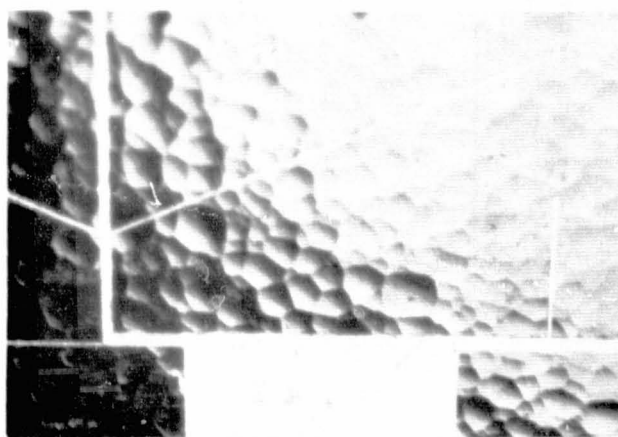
Joint No. 52, Cross Section of Cell Front Contact Weld
